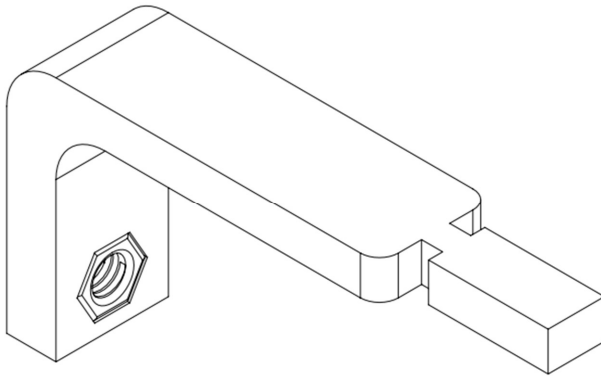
Isometric View of Hex Nut and Finisher Assembled
